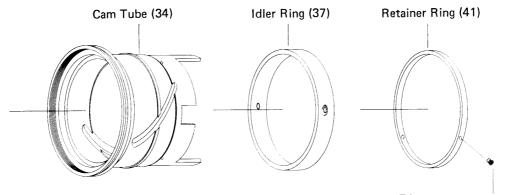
Removal of Idler Ring and Retainer Ring Flathead Screws (42)
